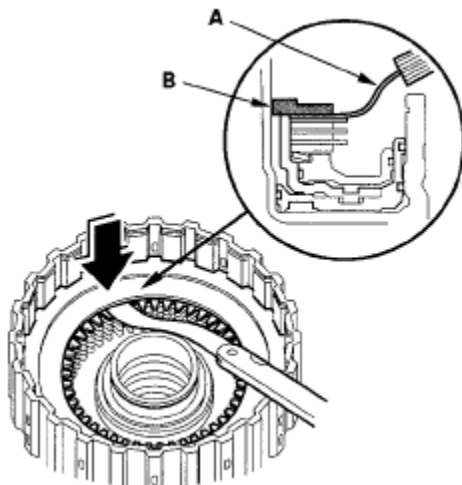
Measuring Clearance Between 1st-Hold Clutch Plate And Top Disc
